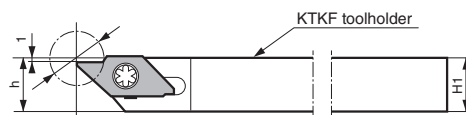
When a TKF-AS/-ASR insert is attached (The cutting edge is 1mm lower than the center line.)
